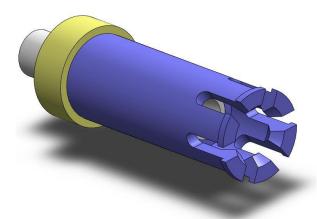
The stop socket for the spring and the snap carrier mounted on the driving shaft.
